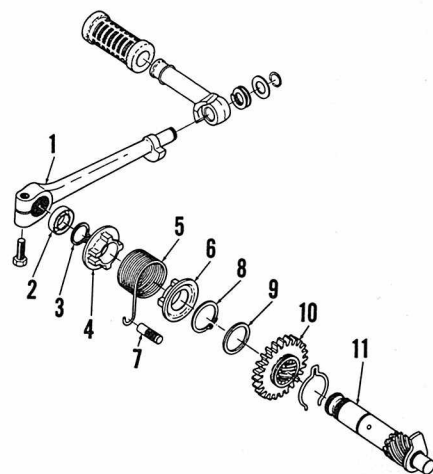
Exploded view of kick-starter assembly. Kick gear is engaged with idle gear only when in use.
